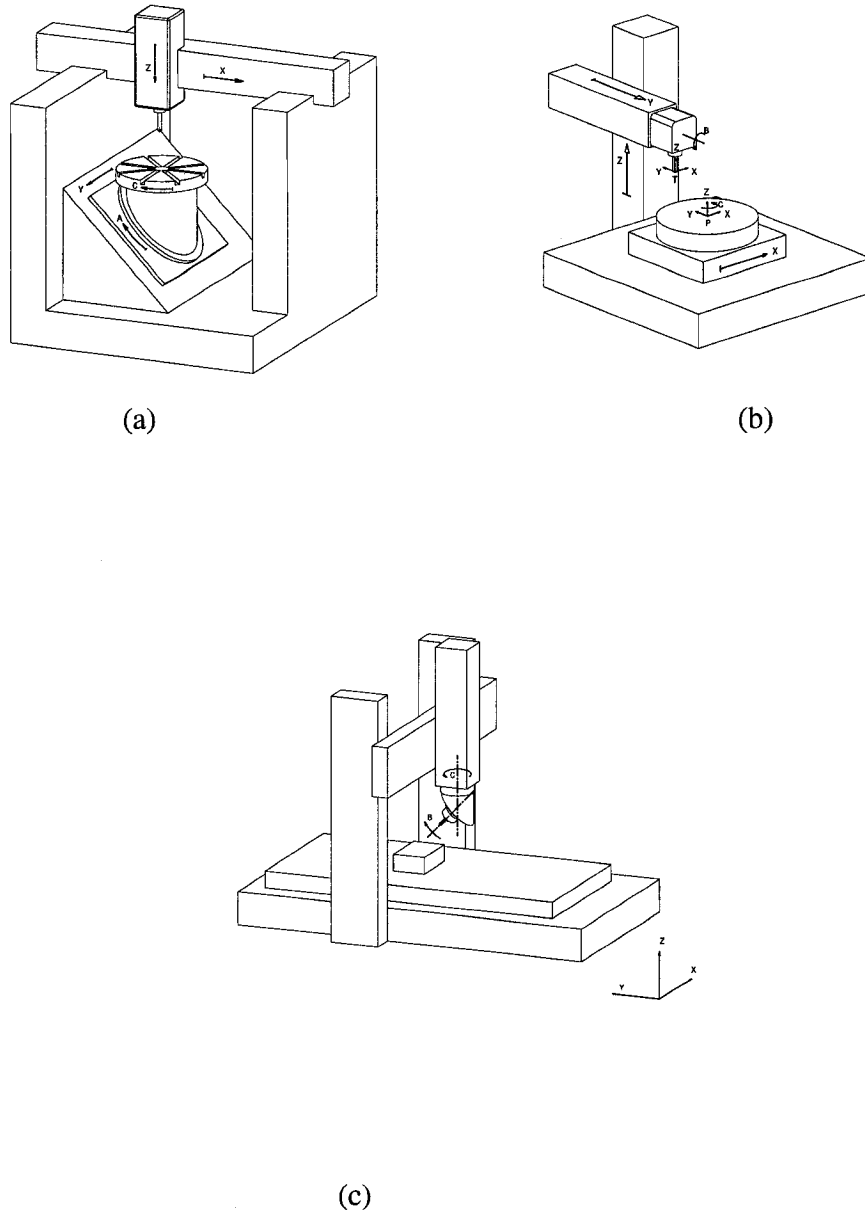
Types of 5-axis milling machines: (a) table rotating type; (b) spindle and table rotating type; (c) spindle rotating type.
